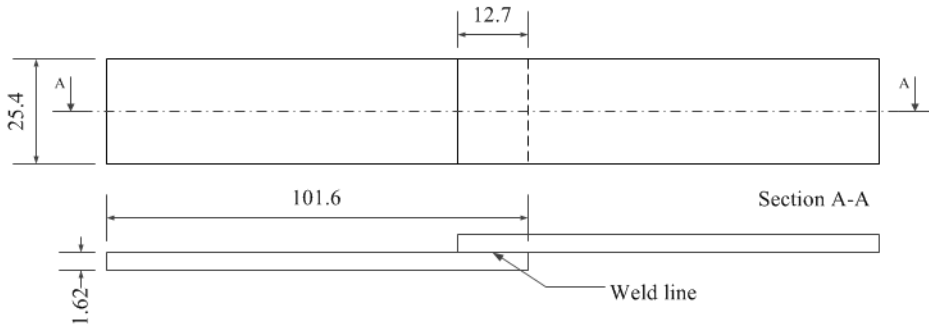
Single-lap joint produced by ultrasonic welding and tested with ultrasonic GWs (dimensions in mm).
